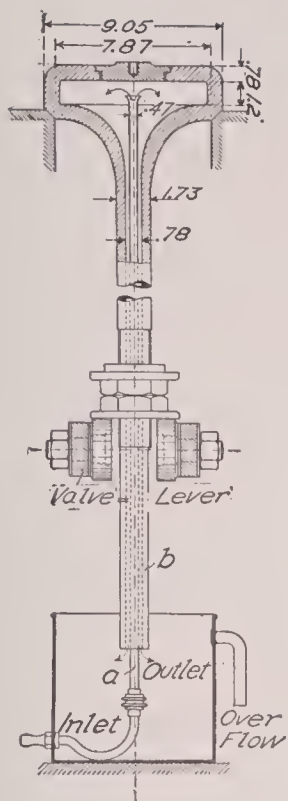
Exhaust Valve, Pawlikowsky type.
